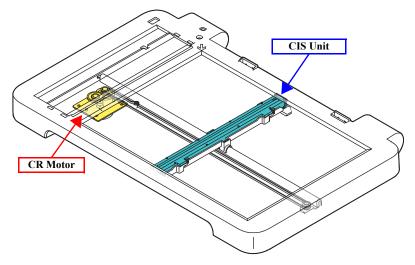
CIS Unit and CR Motor in Scanner Mechanism
